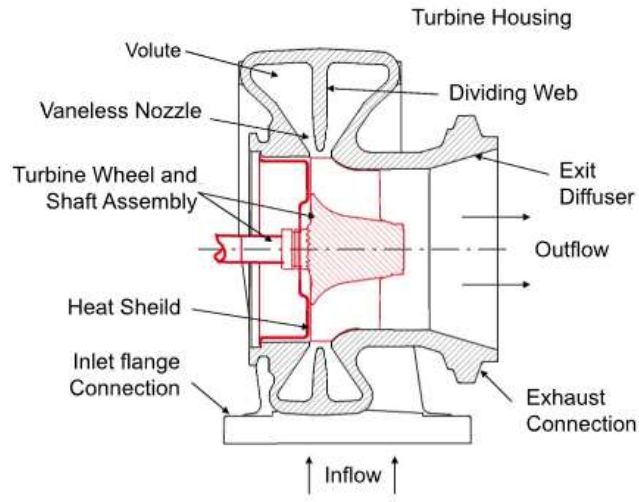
Cut section view of turbine side of turbocharger © Cummins
